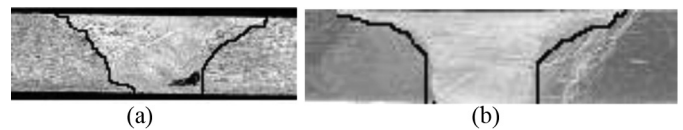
(a) Conventional weldment with crack in the root part of the retreating side. (b) Copper coated and externally heated weldment with no crack.
